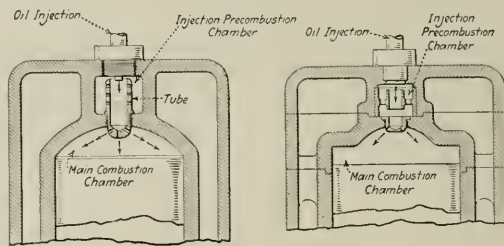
LEISSNER DIVIDED COLD COMBUSTION CHAMBER
